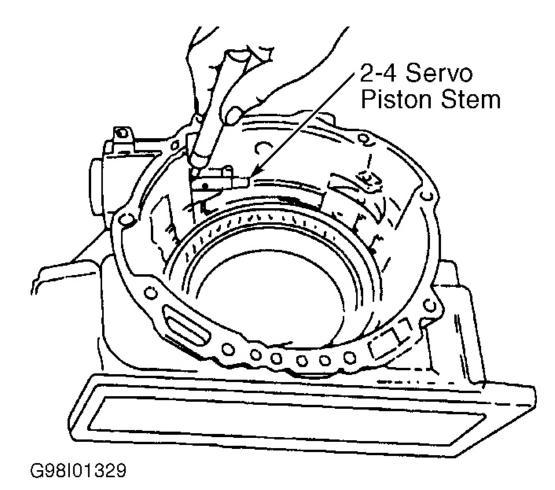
Measuring 2-4 Servo Travel Courtesy of FORD MOTOR CO.
